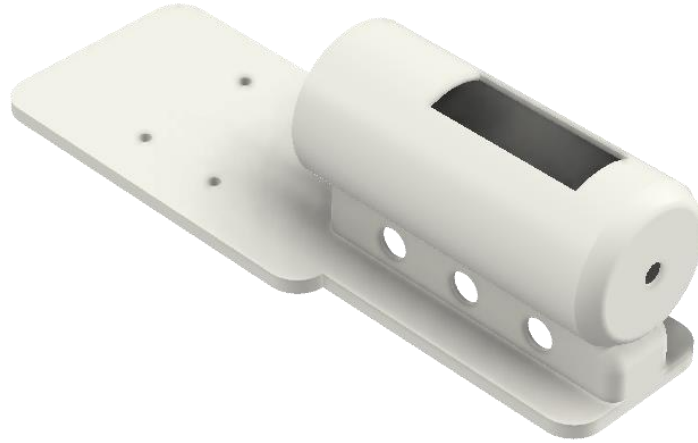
3D CAD model of the frame used to mount all of the components for the pneumatic cuff driver.
